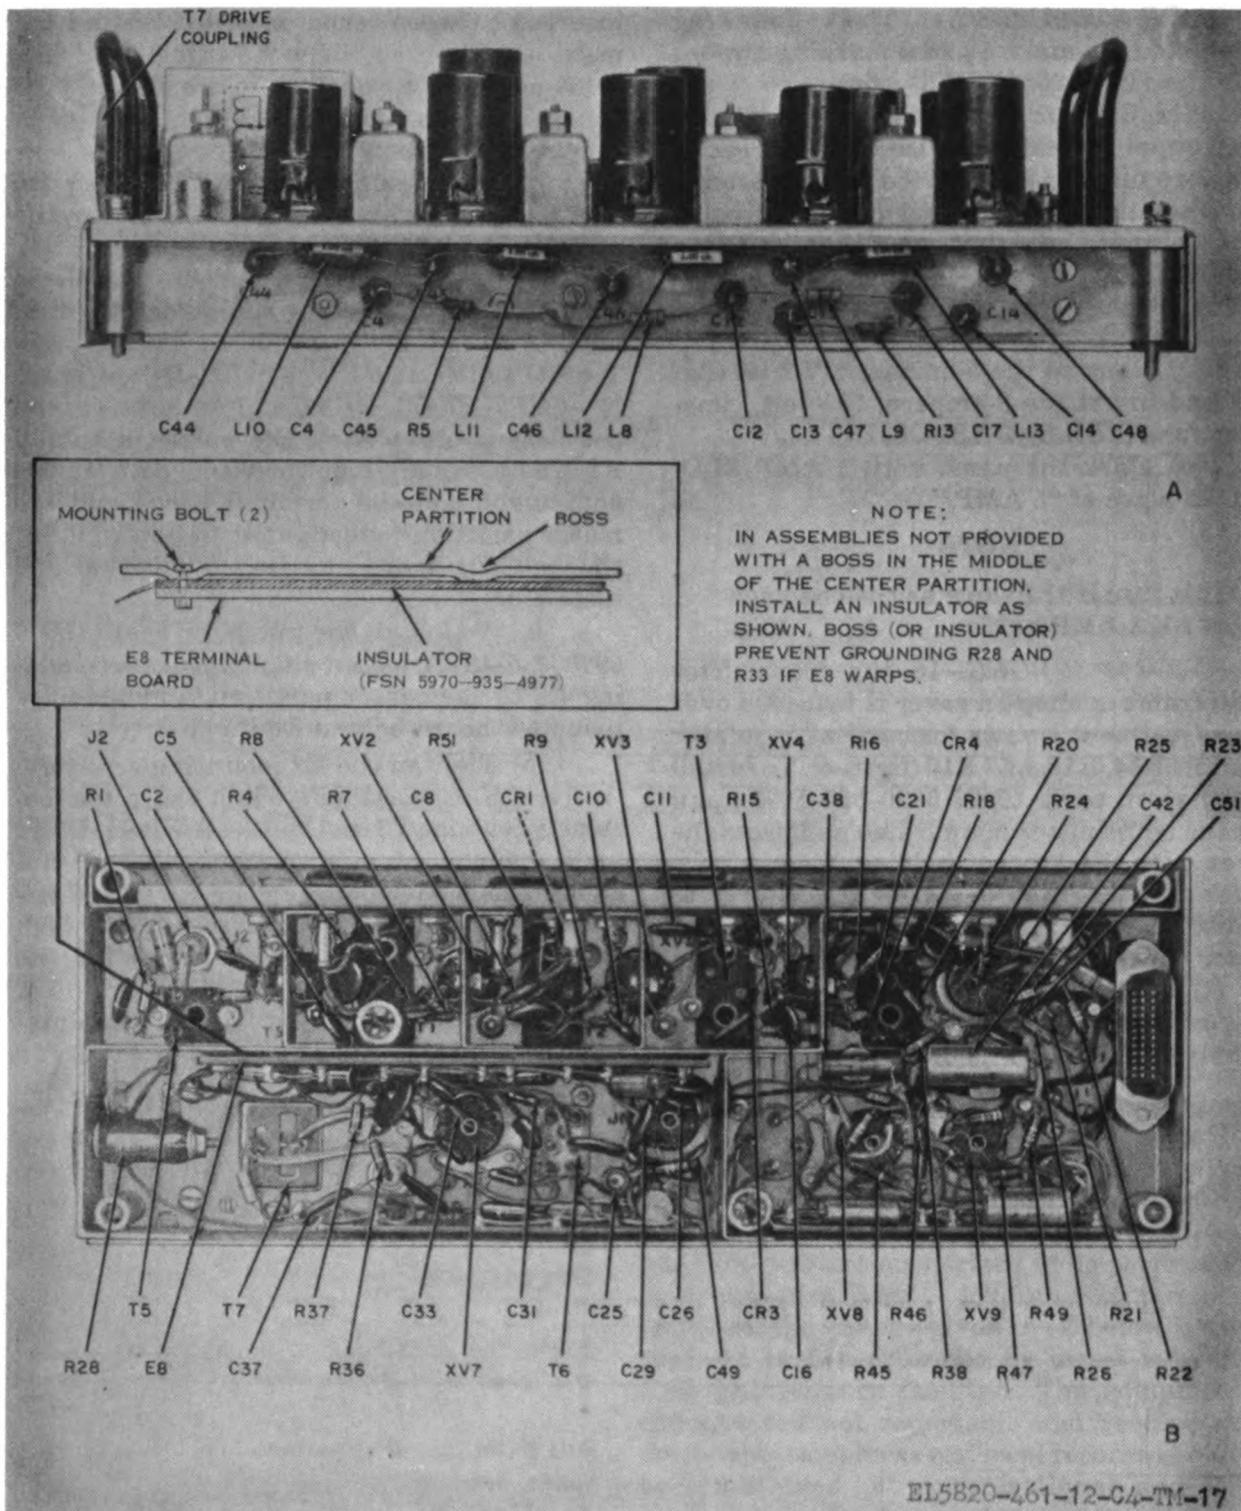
Afc assembly 2A4/3A4, side and bottom views; and details for installing insulator board behind terminal board E8.
